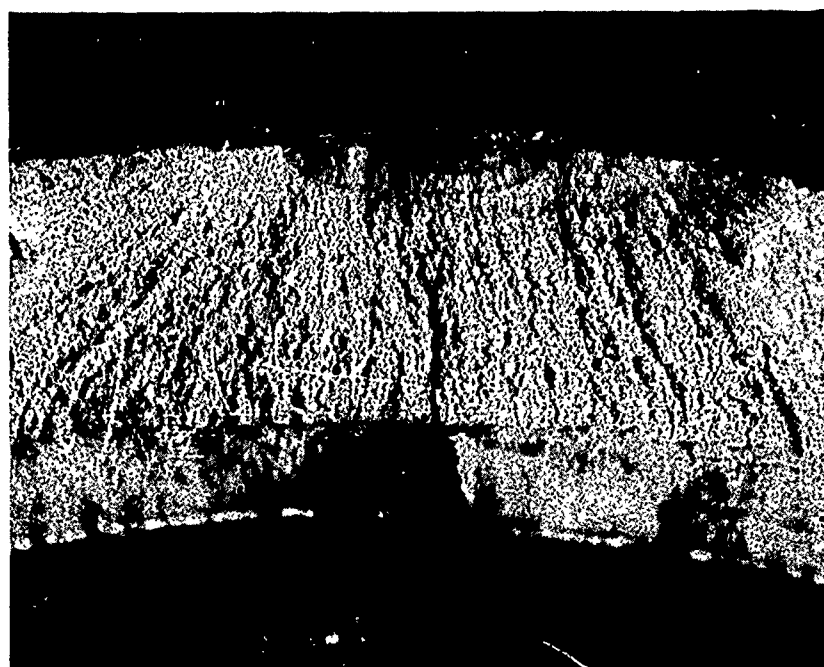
FRACTURE SURFACE OF 4330V MODIFIED STEEL TUBE. NO PRIOR FATIGUE PRECRACKING. AREA SHOWS NATURAL CRACK.
